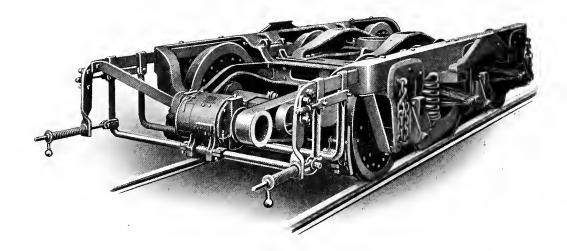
Six-Wheel Truck Equipped with Type M Generator.
